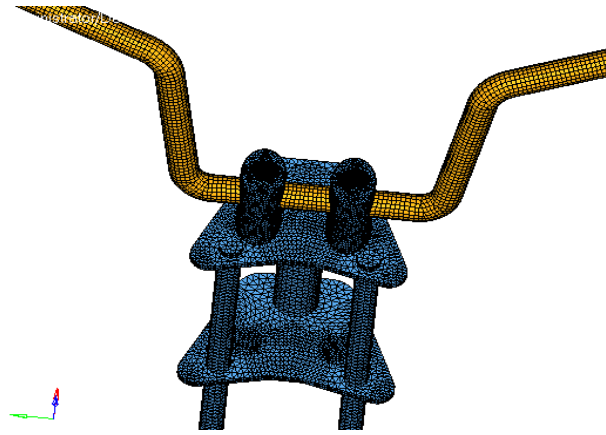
MESHING OF HANDLE BAR ASSEMBLY
